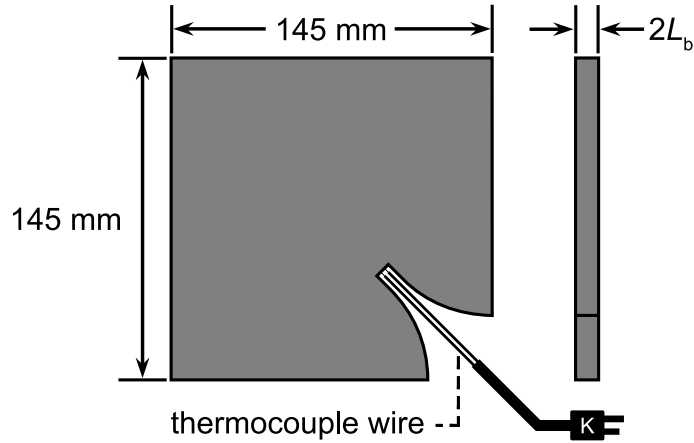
Top and side view of Al-Si coated 22MnB5 blank.
